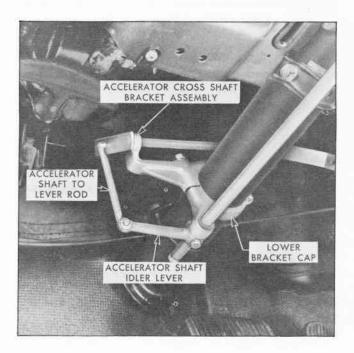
Accelerator Cross-Shaft Assembly Installed
